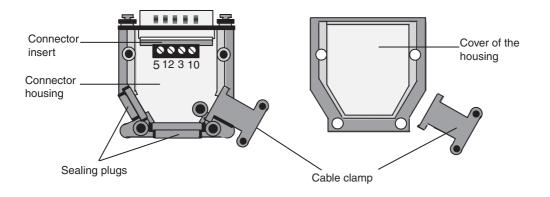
Industrial Twisted Pair D-sub male connector (15-pin) for user assembly
